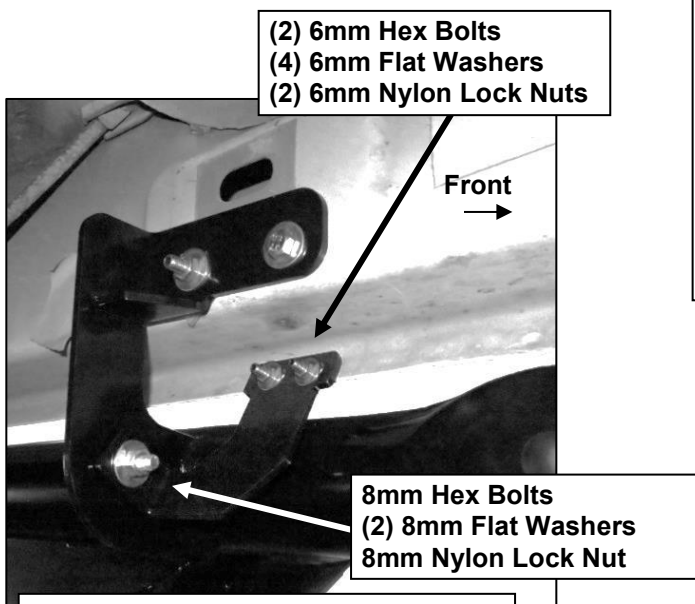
Attach Bracket to threaded end of Bolt Plate first. Remove 8mm Hex Bolt (see Fig 3). Rotate Bolt Plate to line up with remaining factory hex shaped hole.
